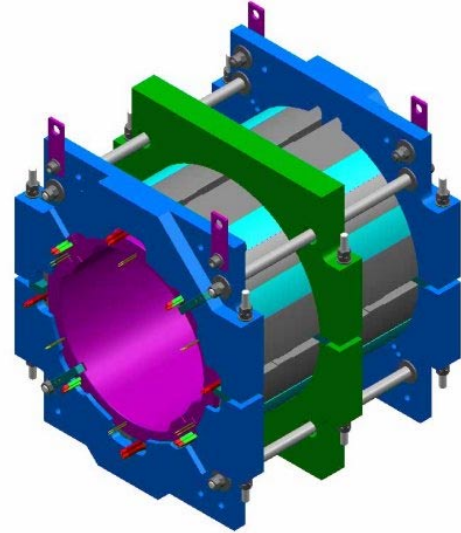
Schematic layout of the new SIS correction units with a three layer coil arrangement: a skew sextupole on printed circuit board combined with skew quadrupole coils in the inner layer and a correction quadrupole in the outer layer.
